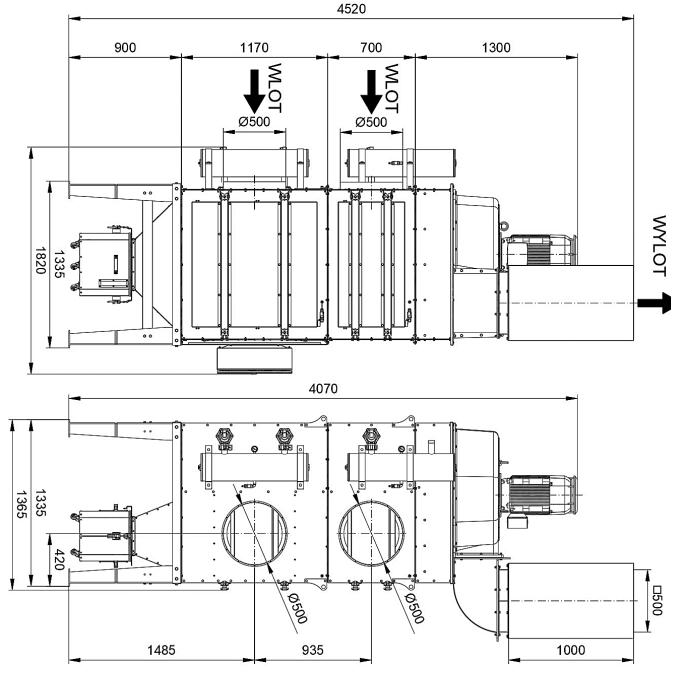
Overall dimensions of the device UFO-A-10000-N(/R)-LH (with an inlet on the left side)
